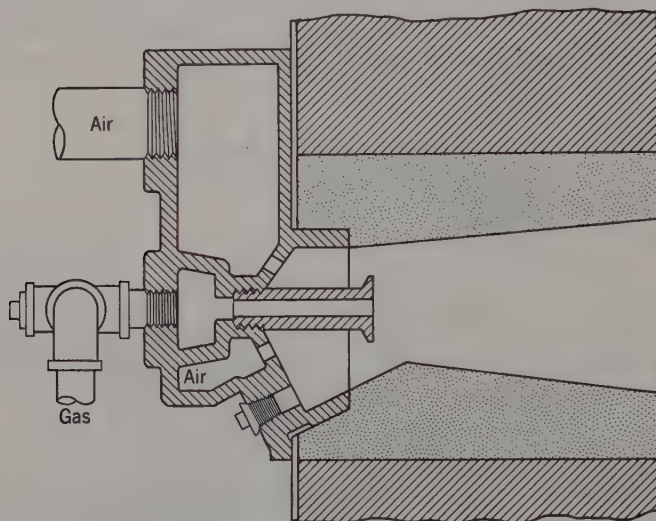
Long-flame burner with cracking of gas in burner tile. Courtesy of Bloom Engineering Co.
